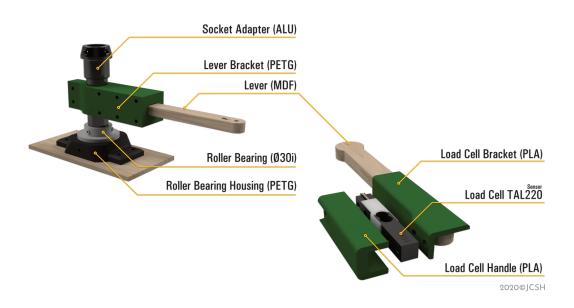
CAD model of the test rig lever and bottom bracket including the roller bearing which the pylon and socket adapter is secured in. On the right is an exploded view of the load cell support (excluding screws for mounting).
